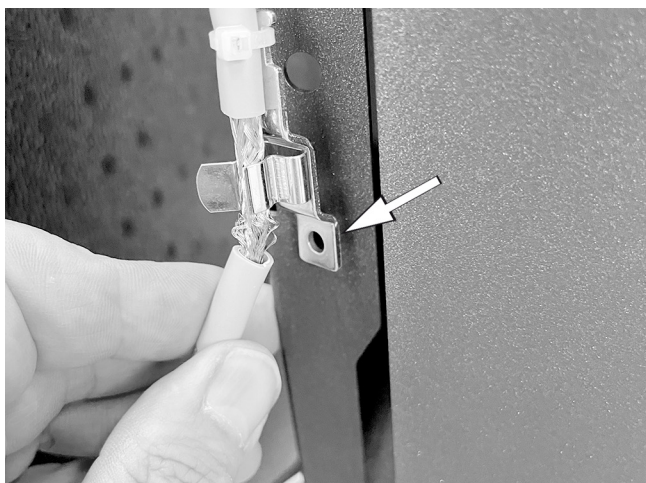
Attaching the shield clamp to the SolvisBen mains board door
